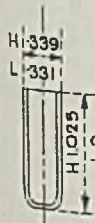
A — Second draw, done with tool shown in Fig. 4B. All dimensions are inches
